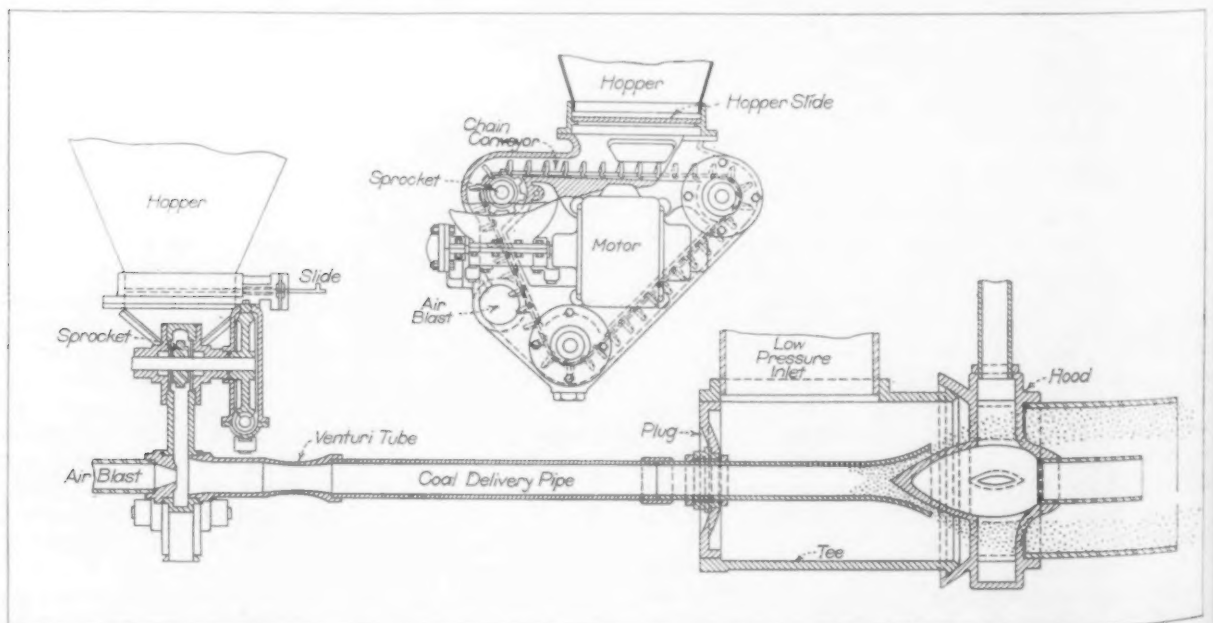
Powdered Coal Burner with Flight Type Feeder
